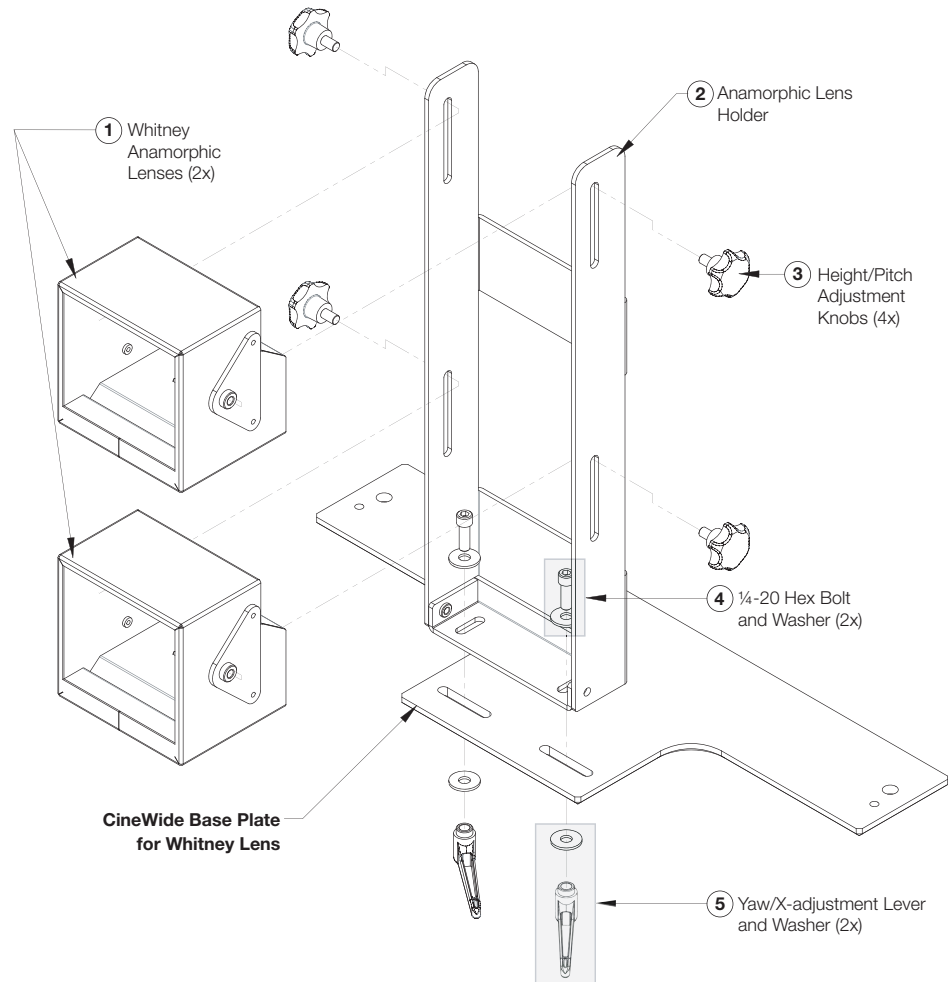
Whitney Anamorphic Lens Mounting Assembly - Exploded View
